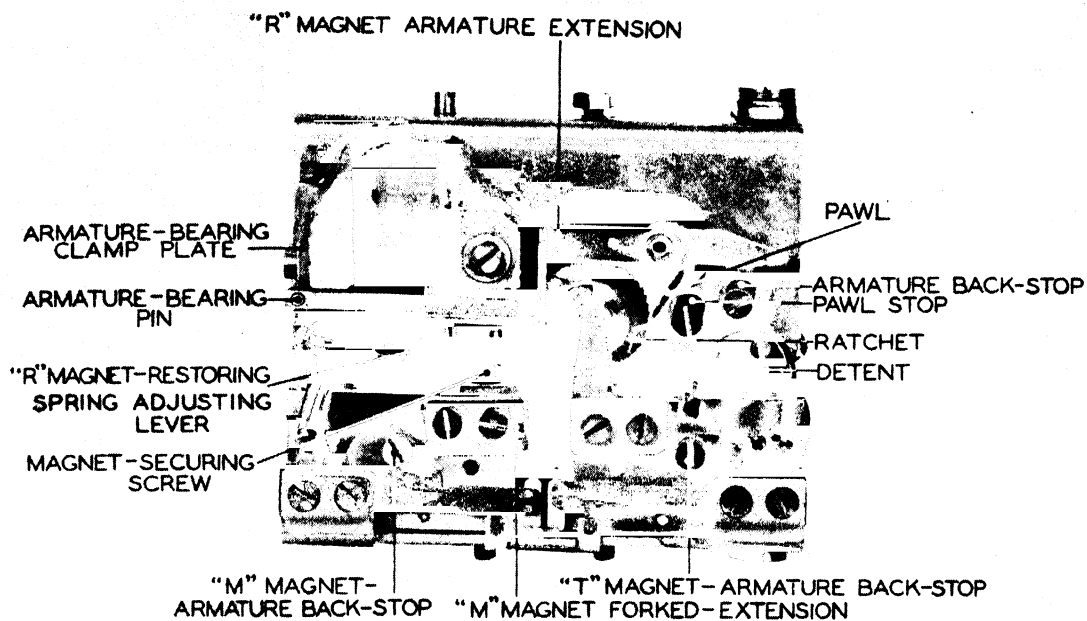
SIDE VIEW OF REGENERATOR SHOWING DETAILS OF MAGNETS, STORAGE RATCHET, ETC.
